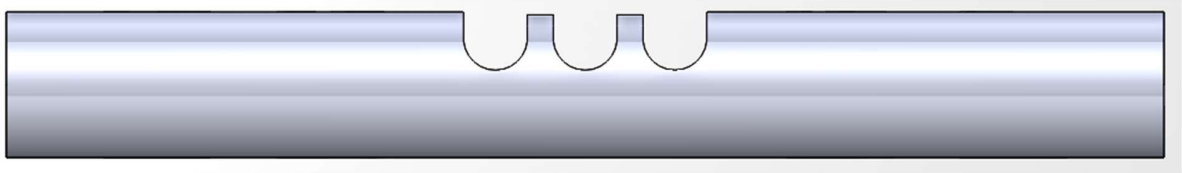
Machined grooves for electrical wiring. Grooves are 5mm in width, spaced 2.5mm apart. Casing is 12.5cm wide in total
